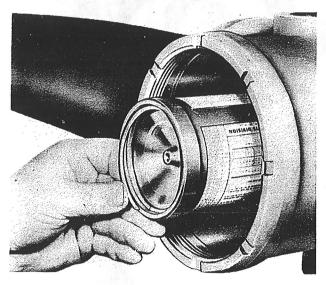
Installing Torque Cylinder Head Retaining Snap Ring
